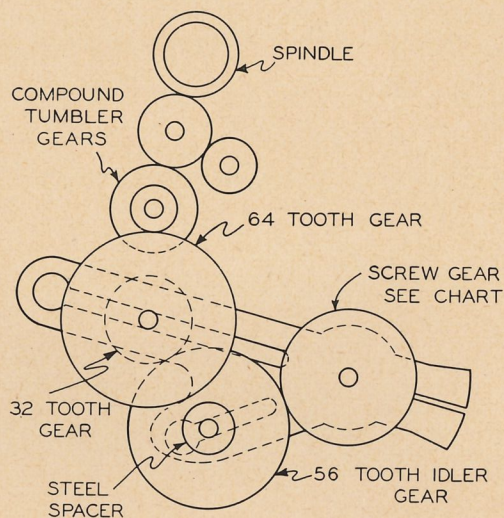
Gear set-up for 72 and 80 threads per inch.
